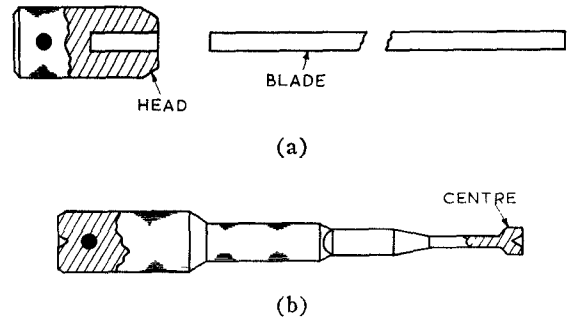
Manufacture of permanent formers; (a) rectangular mandrel made separately and brazed into its head, (b) complex former with various sections made in one piece. The centre at the free end is removed in a final operation.
